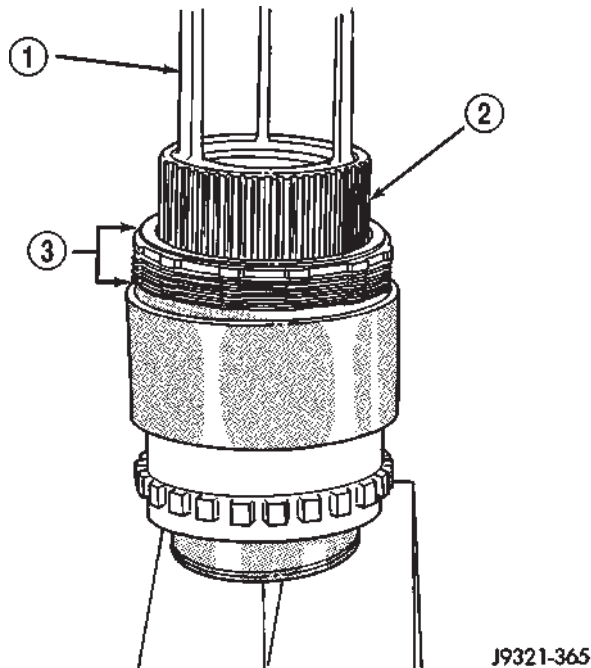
Direct Clutch Pack Snap-Ring Removal
